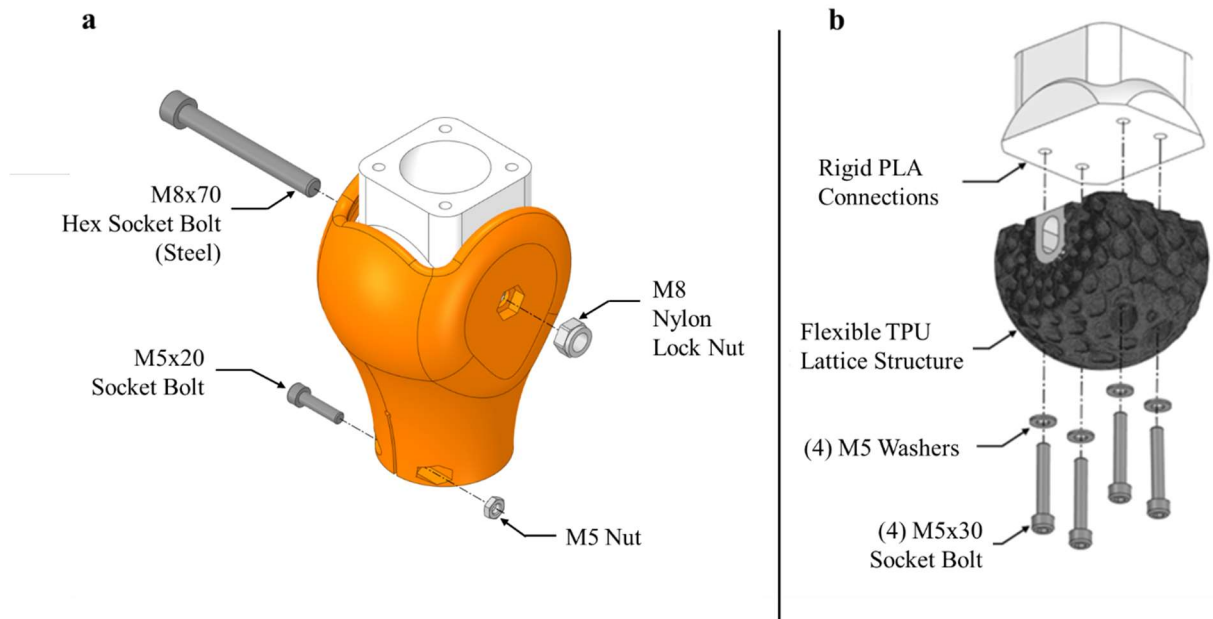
Exploded view of hardware components (a) PKJ assembly (b) Lattice assembly.
